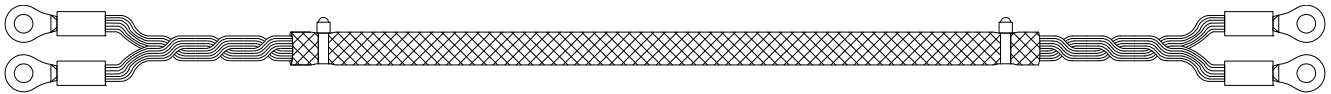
VL4000 Ballast to Ignitor Cable Assembly
